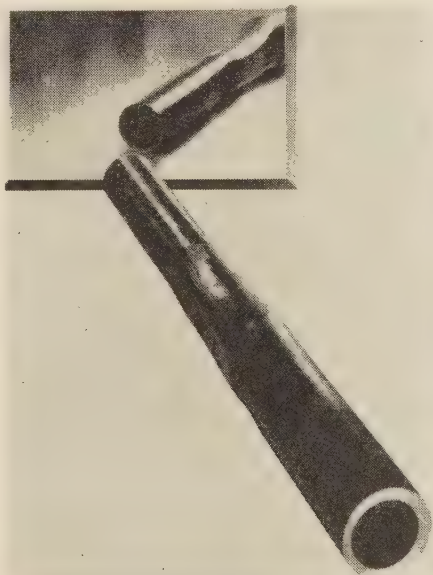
TUBE PARTIALLY ROLLED FROM ECCENTRIC BLANK
